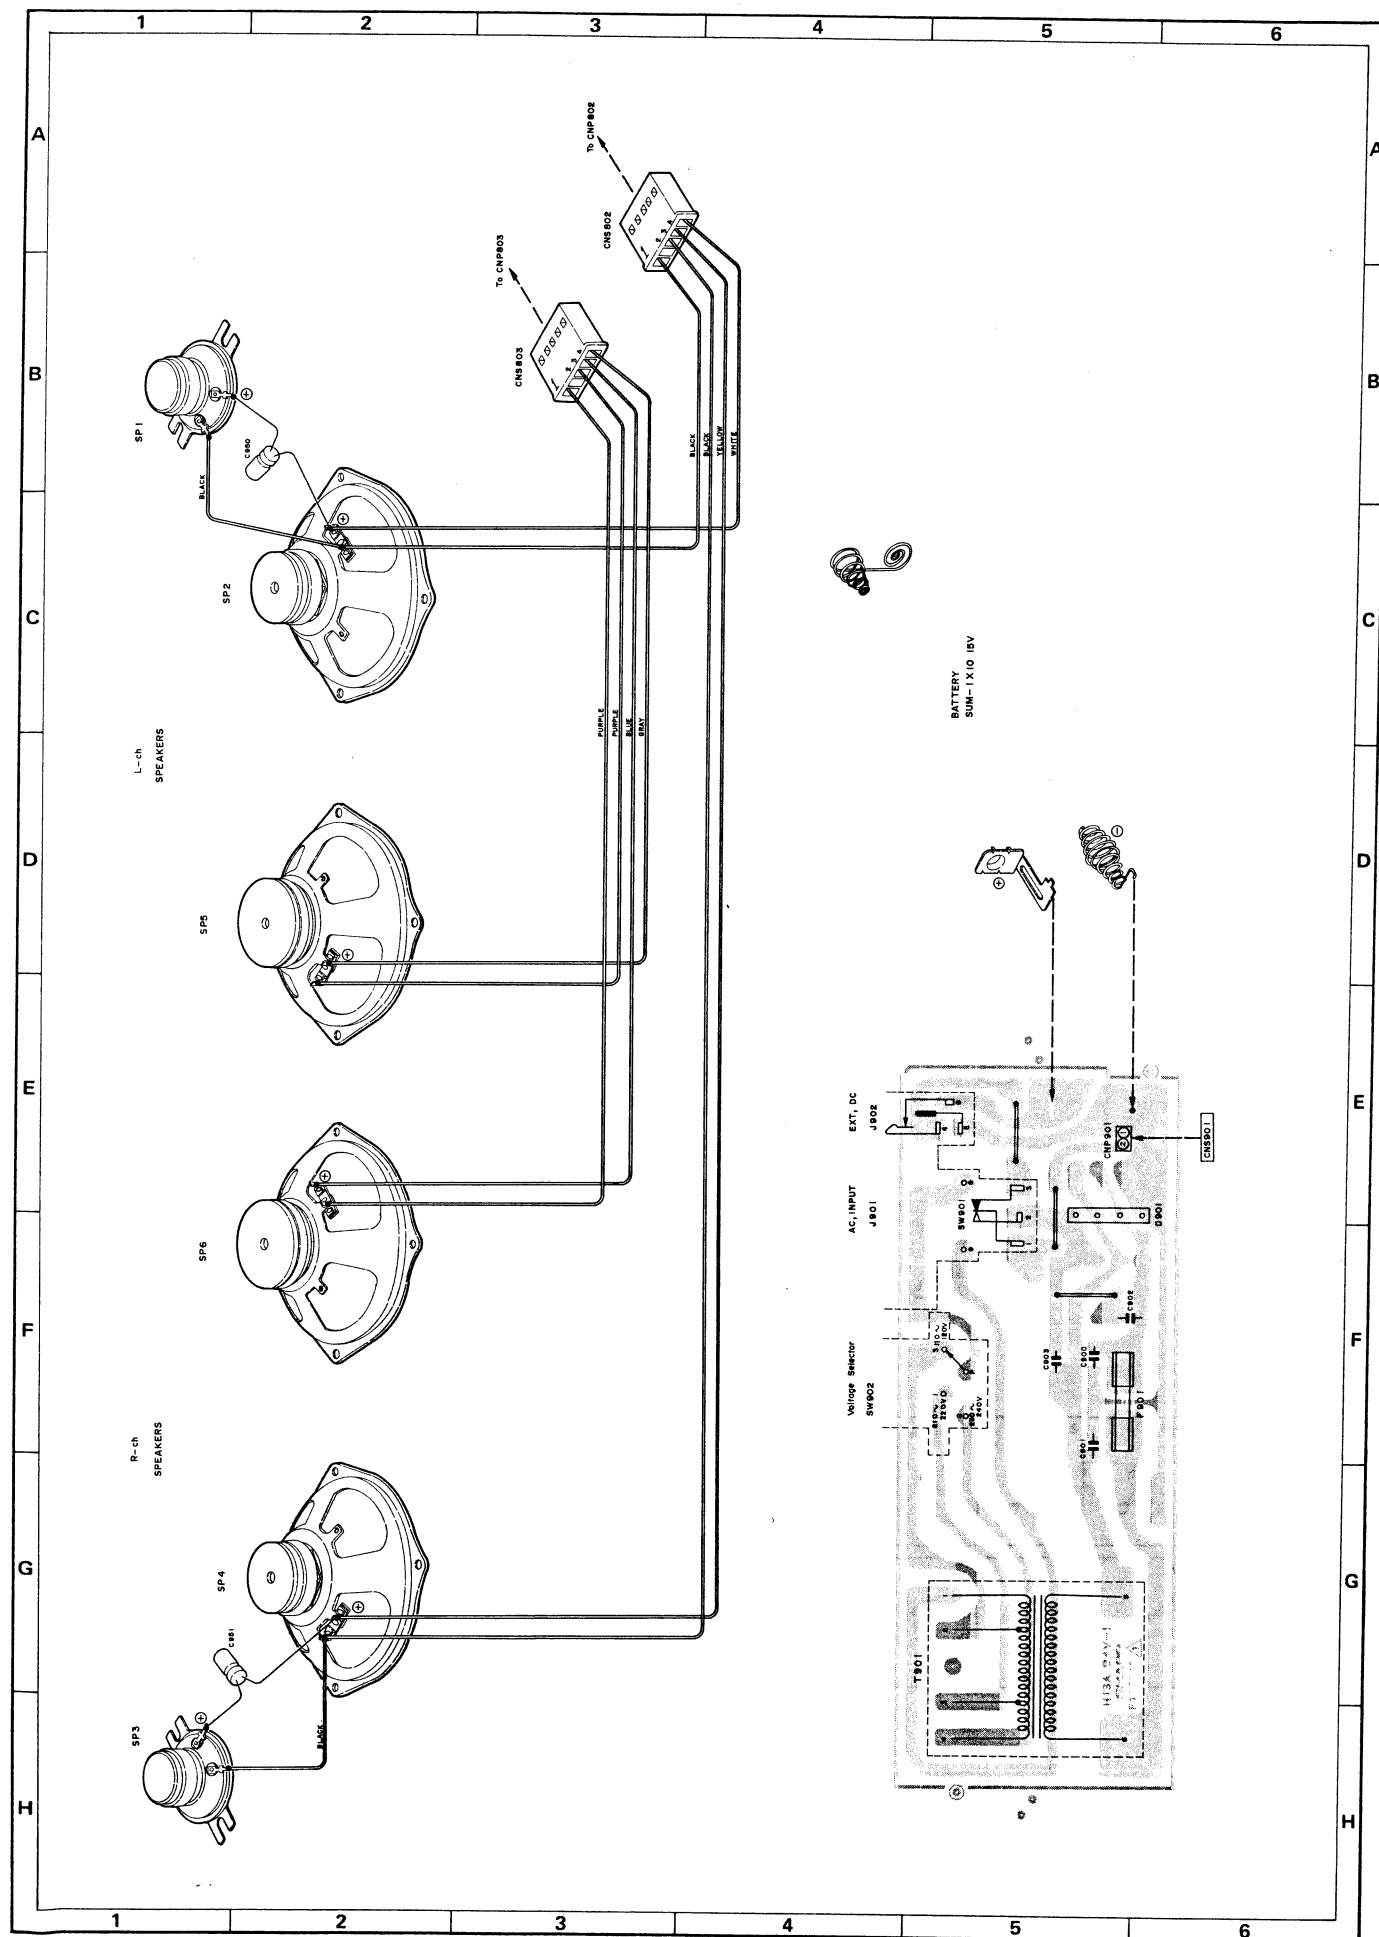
WIRING SIDE OF P.W. BOARD (6/6)
